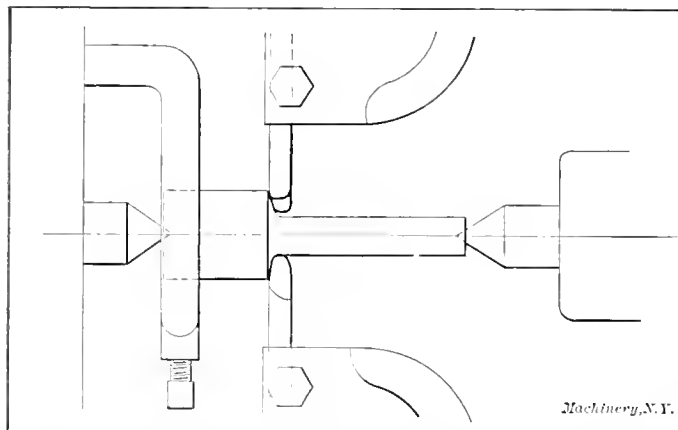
Arrangement of Tools for Taking Heavy Cuts on Small Work
